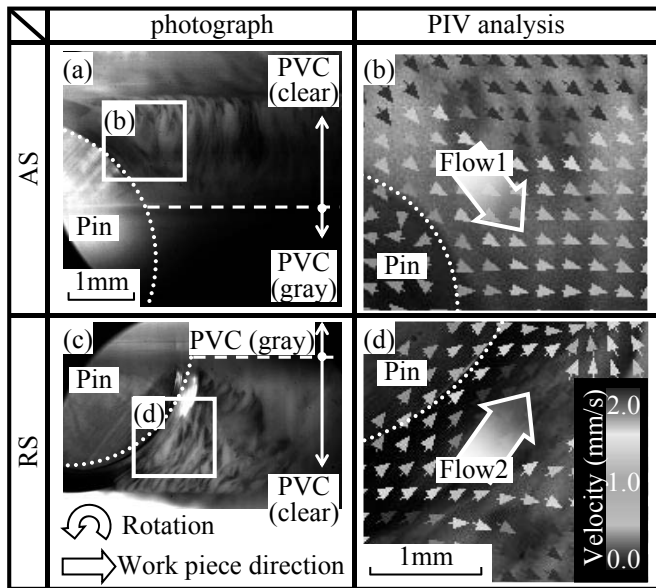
Material flow of weld with high speed video camera and analysis of PIV.
